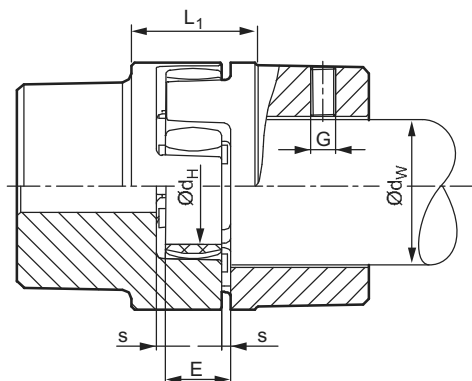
Mounting dimensions of the ROTEX coupling 51689AXX
